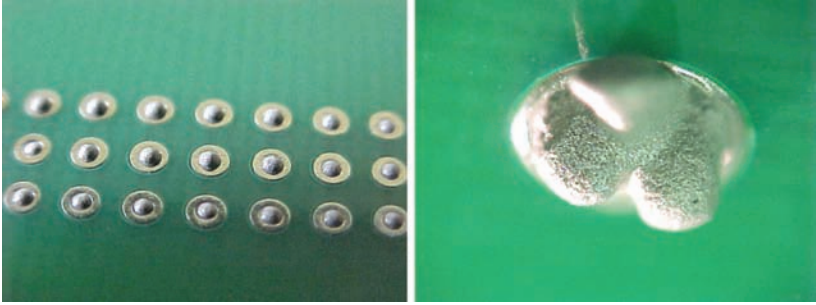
Examples of paste protruding below the surface of the board after the printing operation and prior to component insertion. Paste in 0.9mm holes (left). 3.5mm fixture location holes (right).
